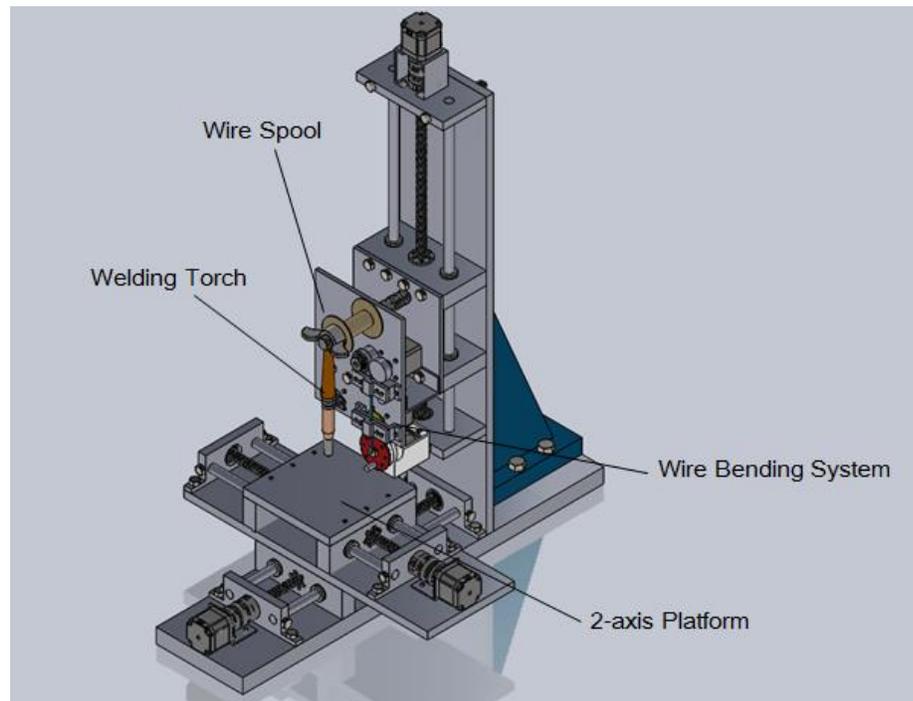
Proposed structure for the metal wire-feed prototyping machine [14]
